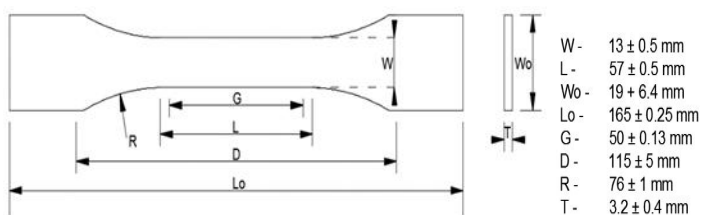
Specimens for the uniaxial tension tests (schematics and test layout)
